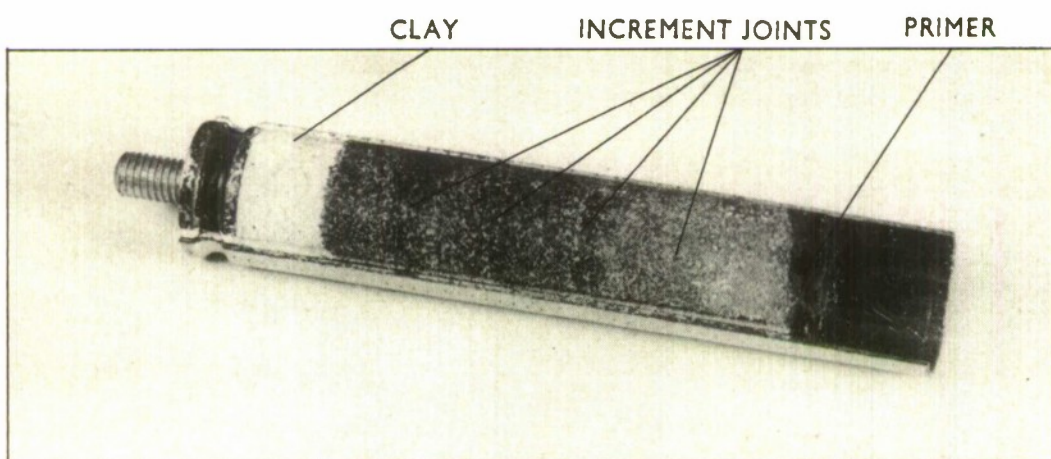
SECTION THROUGH AN UNLINED STEEL CASE FLARE
